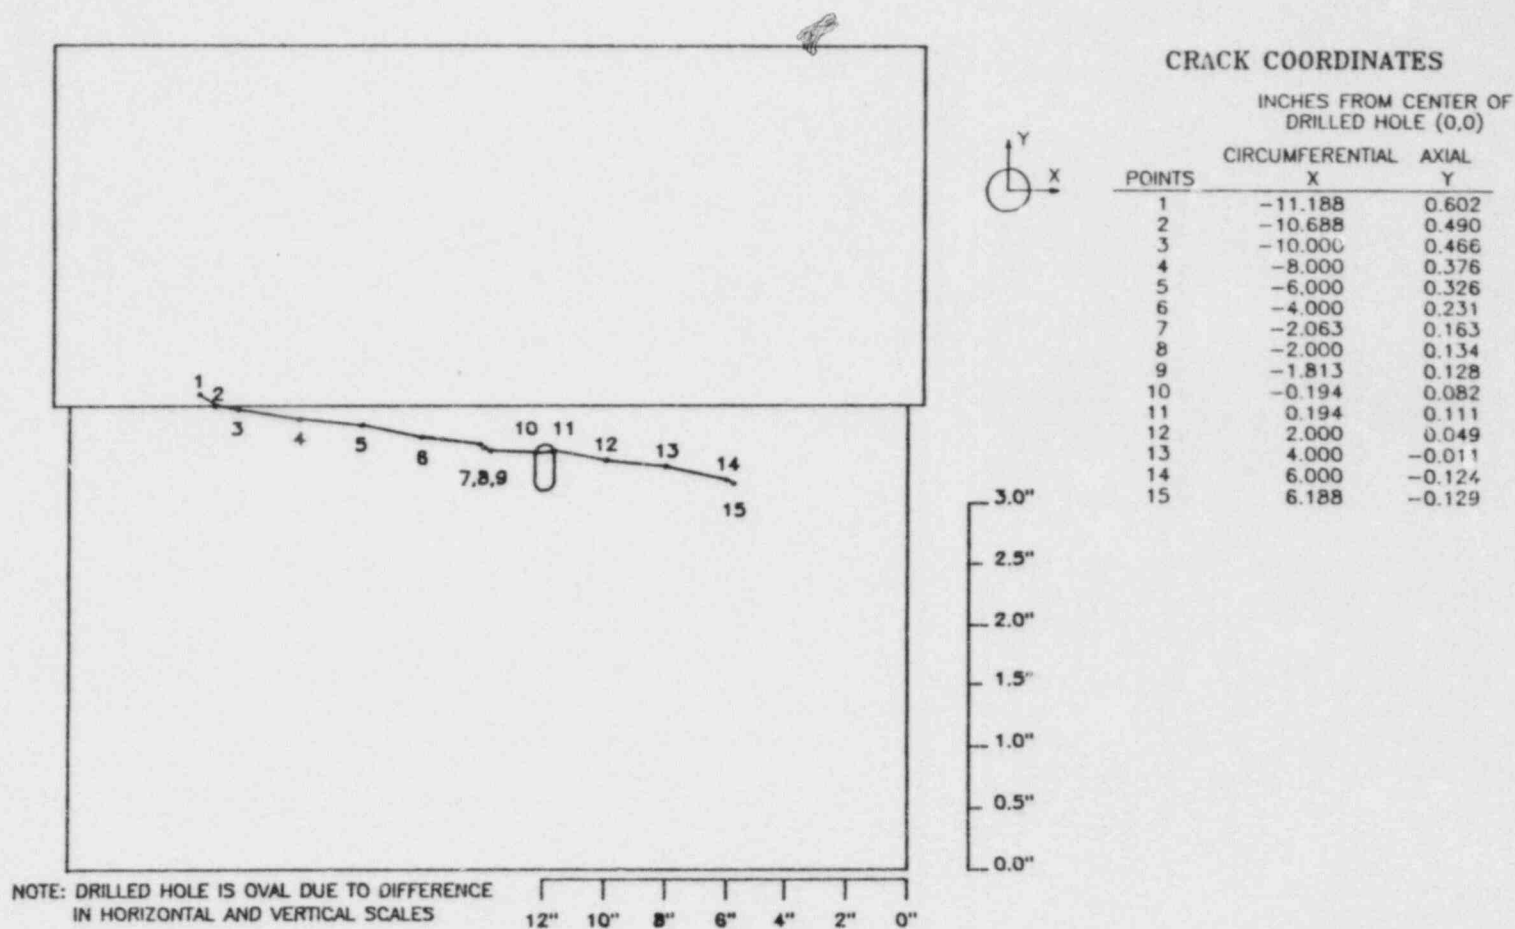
Pump Shaft Dimensions and Crack Location
